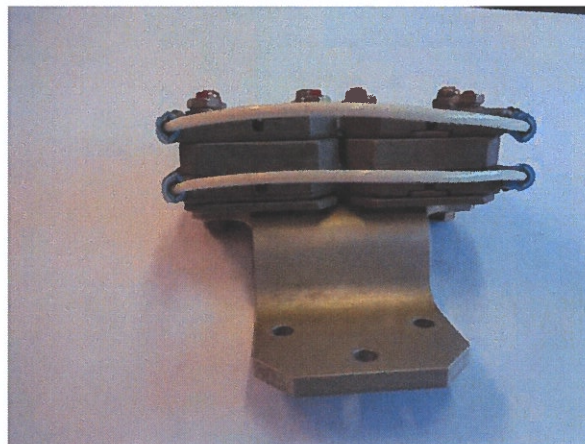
Brush block assembly P/N:066-5300 with connecting cables P/N:300-753
